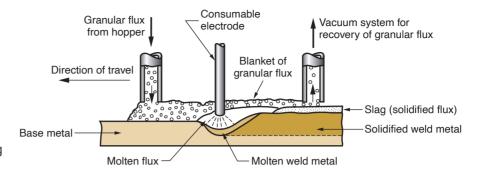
Submerged arc welding (SAW).
